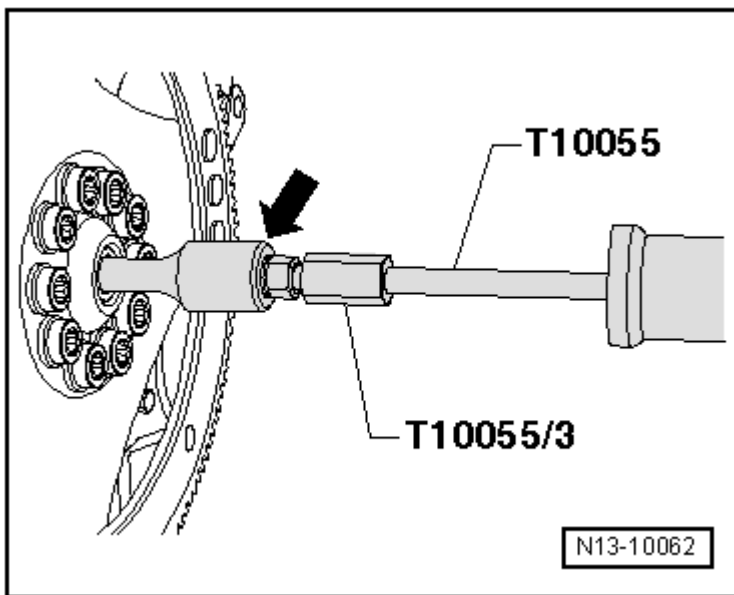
Identifying Standard Extractor E.G. Kukko 21/2, Adapter T10055/3 And Puller T10055
